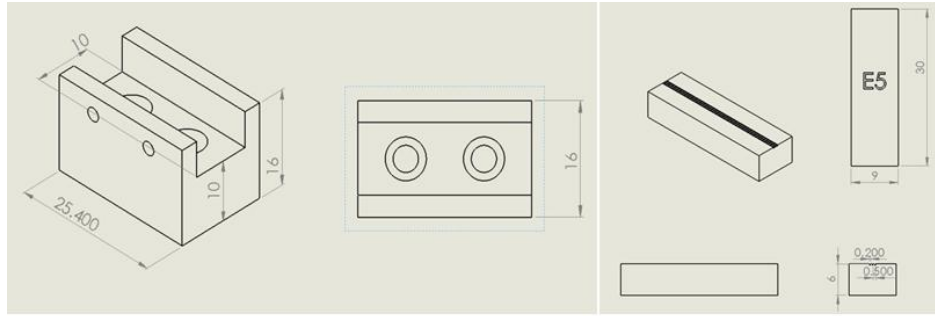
Fibre holders and support designs for 3D printing. Dimensions in mm.
